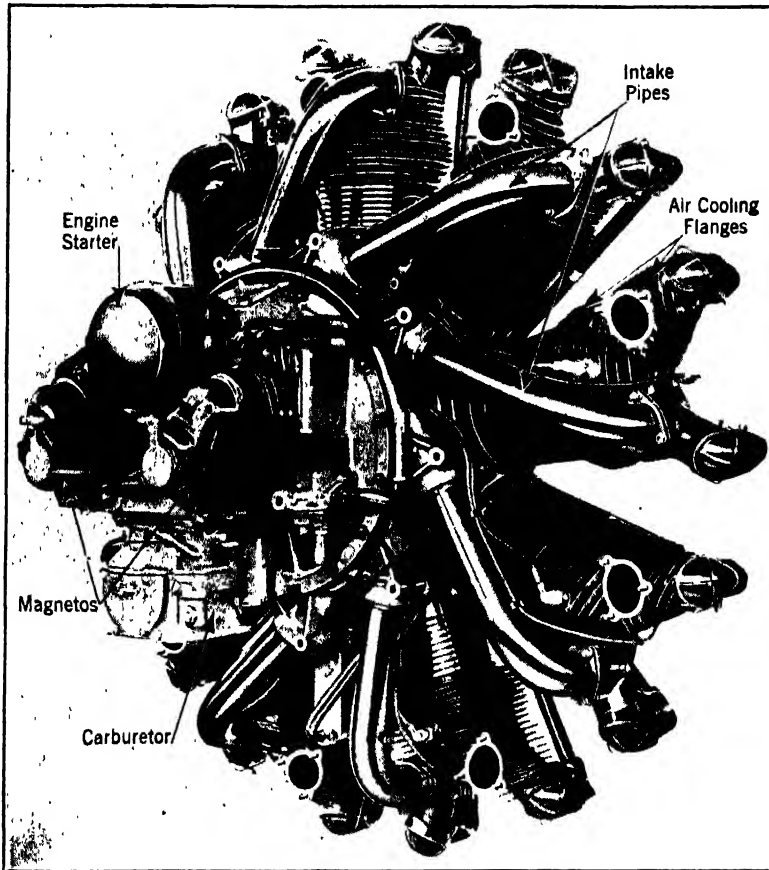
Three-Quarter Rear View of Pratt and Whitney "Wasp," Showing Ignition Magnetos, Carburetor, Eclipse Starter and Induction Pipes.
